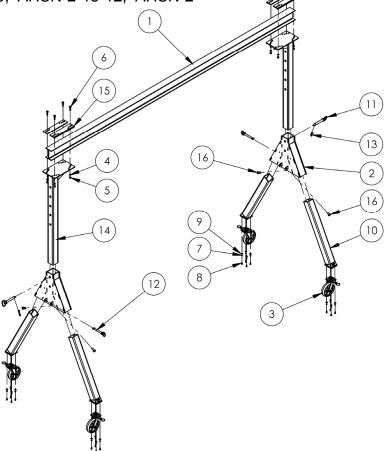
FIG. A: Exploded Parts Diagram for Models AHSN-2-10-12, AHSN-2-10-14, & AHSN-2-10-16
